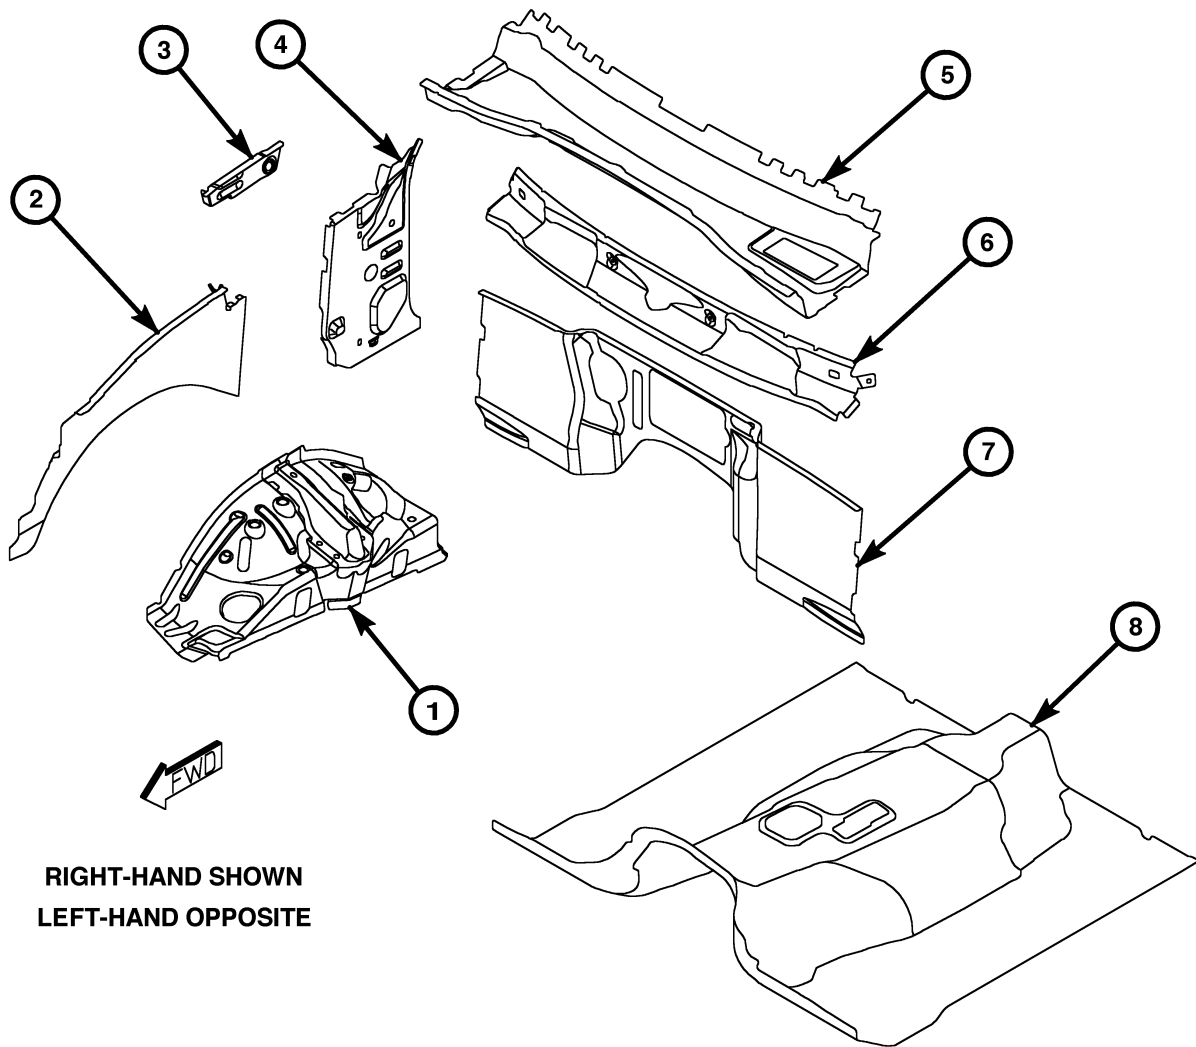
DASH PANEL/WHEELHOUSE ASSEMBLY
